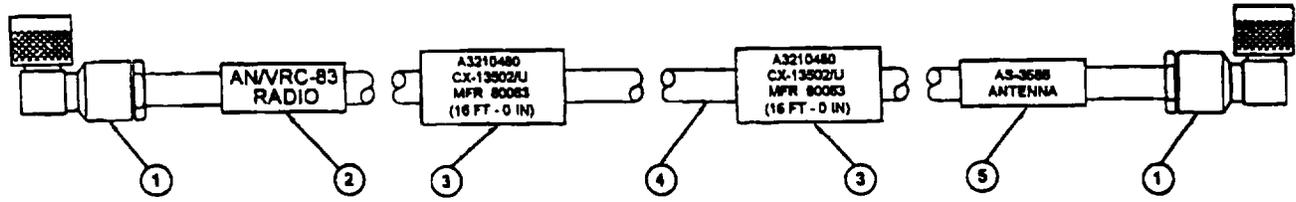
Cable Assembly, Special Purpose, CX-13502/U
